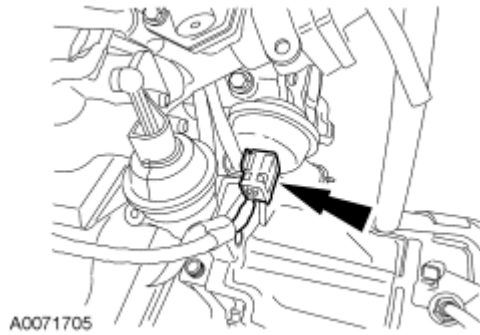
Locating Intake Manifold Runner Control (IMRC) Actuator Electrical Connector
